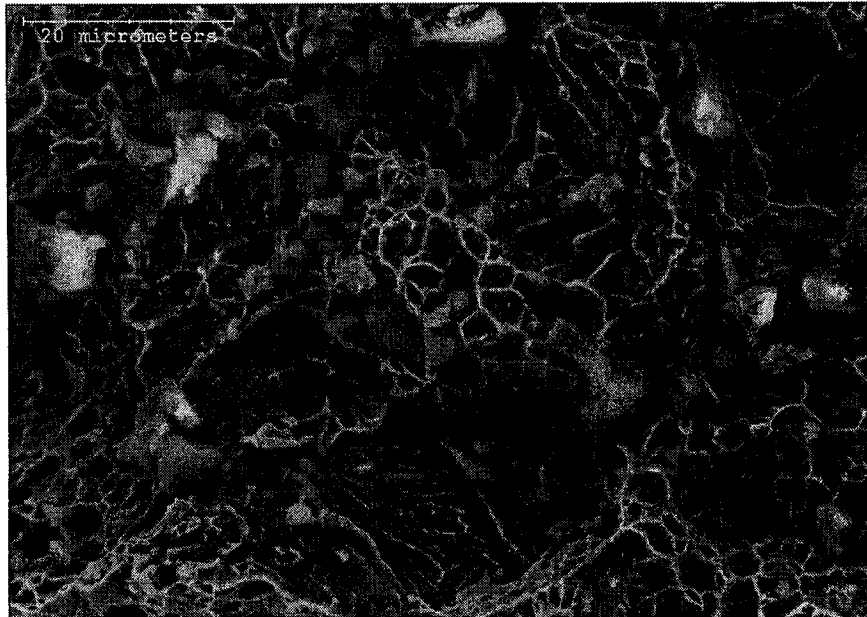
Fracture Surface of Test Specimen T17-2
